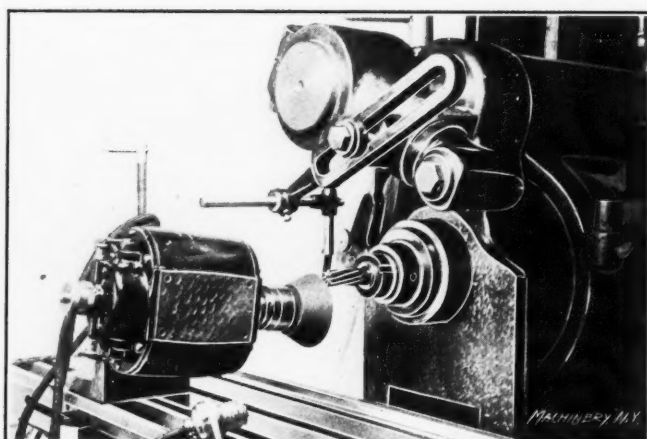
Sharpening the End Teeth of a Small End Mill in place in the Milling Machine Spindle.
